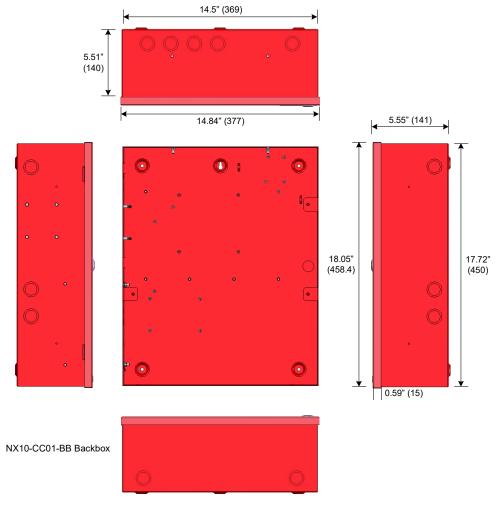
NX10-FACP-1C Enclosure Dimensions
